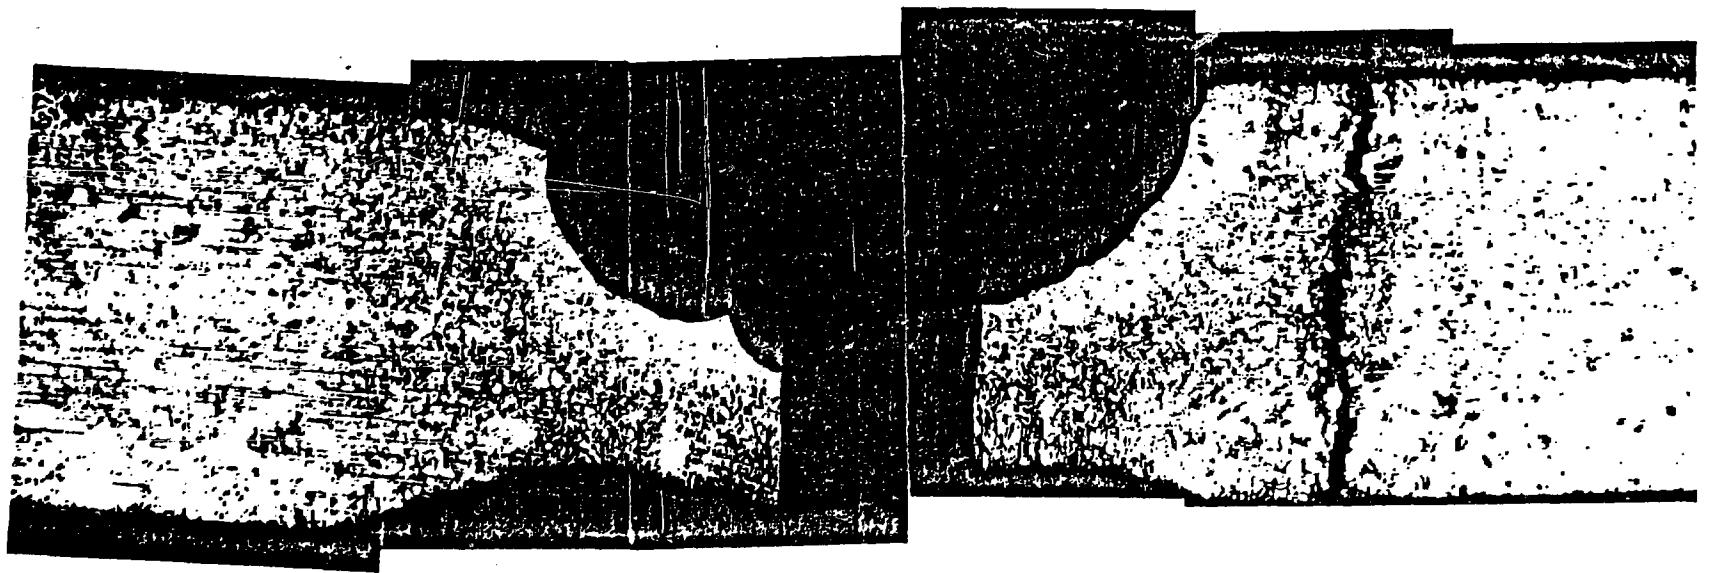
Photomicrograph of specimen showing crack, counterbore and weldment.
